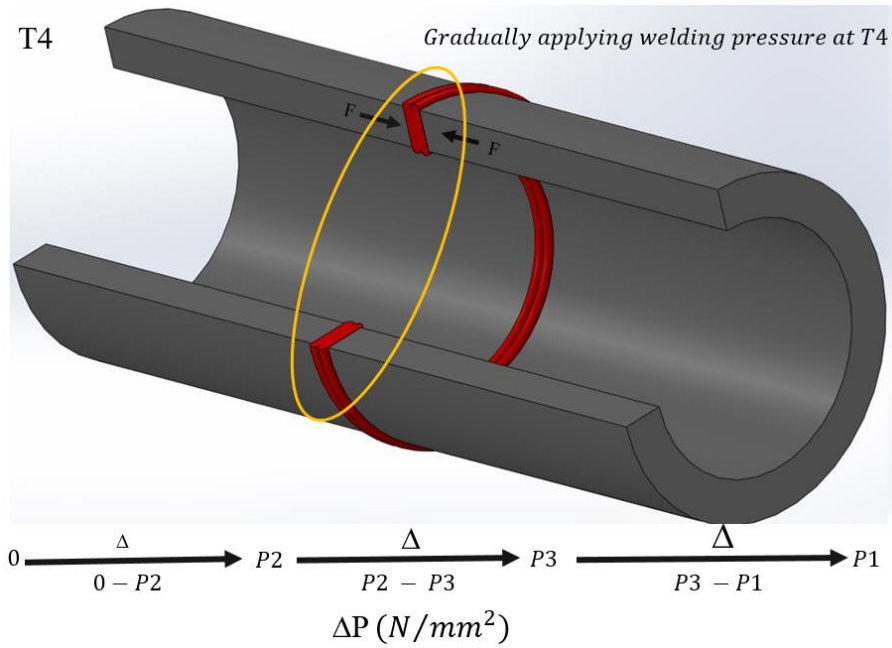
The gradual application of pressure (P1) at T4 improves the resulting welded joints
